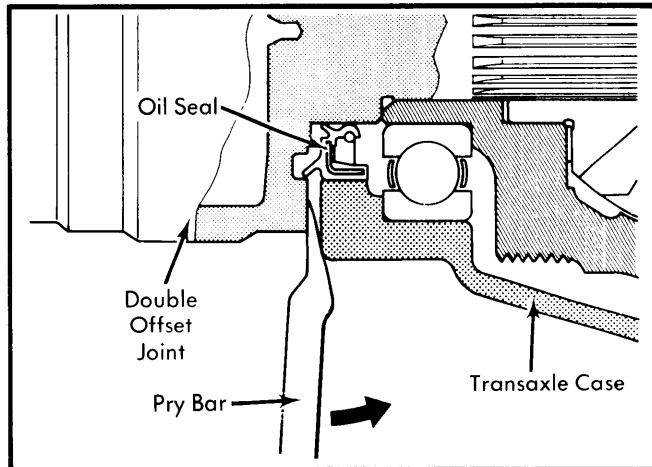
Removing Drive Shaft From Transaxle (Champ & Colt)
